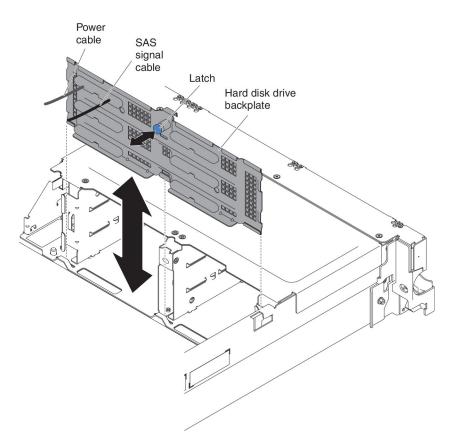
3.5-inch simple-swap/hot-swap hard disk drive backplate assembly/backplane installation
